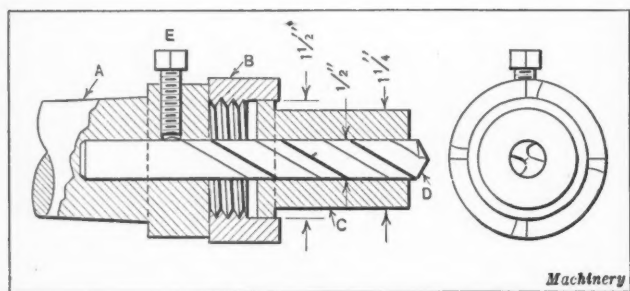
Tool used on Vertical Drilling Machine for First Operation on Bushing C
